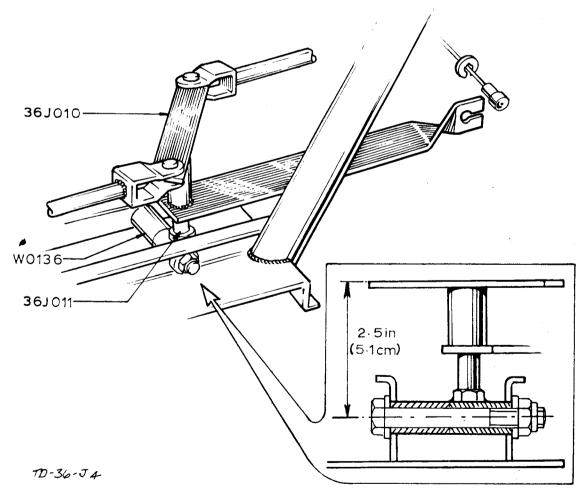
HANDBRAKE LINKAGE & ACTUATING RODS ASSEMBLY
